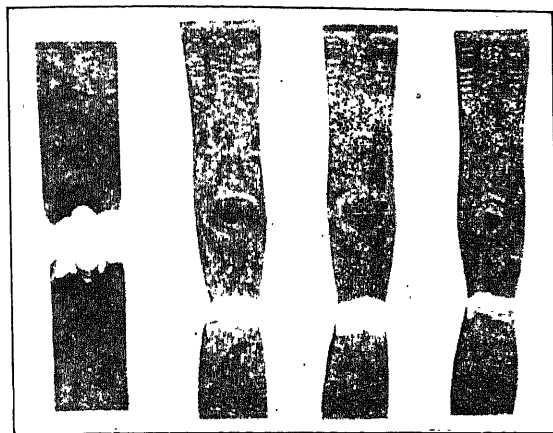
Plates Shown in Fig. 327 After Pulling in the Testing Machine.
